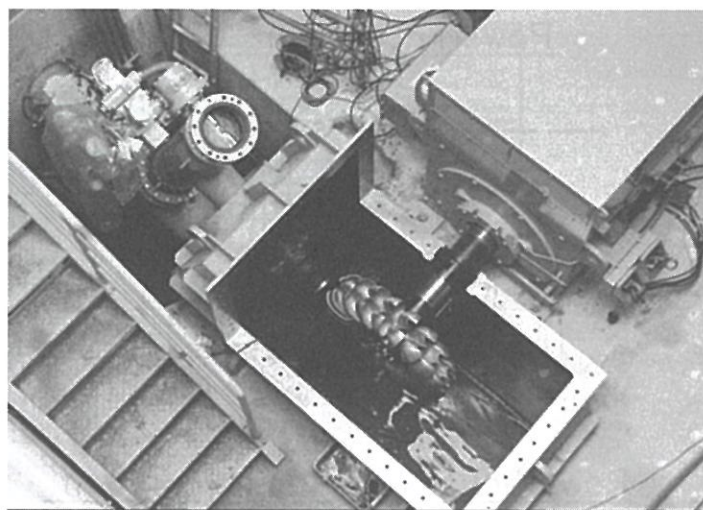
Installation of the new simplified pelton turbine of the Tsuchimurogawa hydropower plant.
